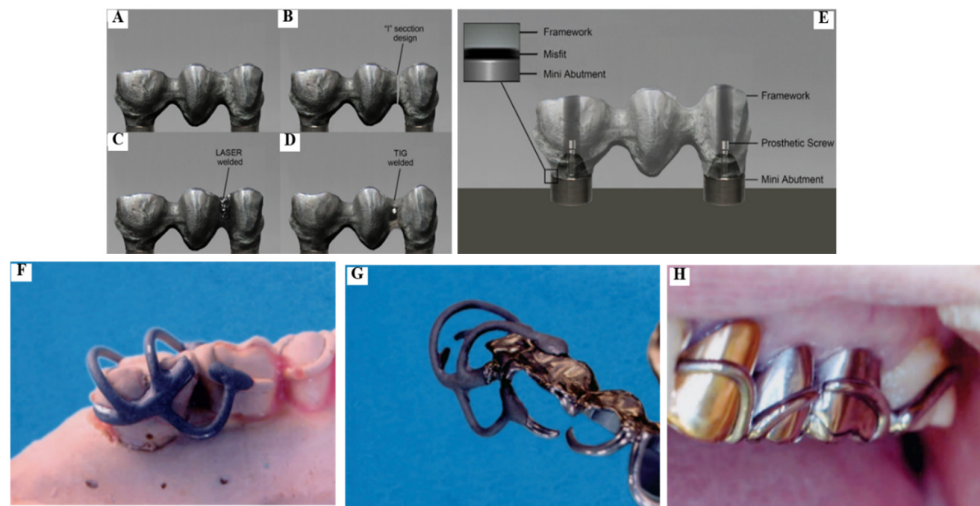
Applications of welding in biomedical applications: (a) framework before sectioning, (b) I-section design, (c) frame work after laser welding, (d) framework after TIG welding, (e) terminology of prosthetic components, (f) repaired clasp with hook to connect to existing clasps, (g) repaired clasp connected using laser welding and (h) repaired prosthesis [3 and 6].
